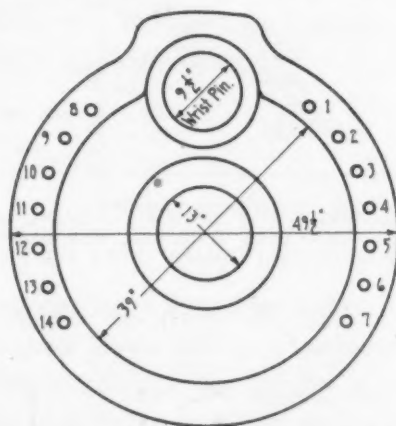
Location of Core Drill Tests on Gear Center Casting.
